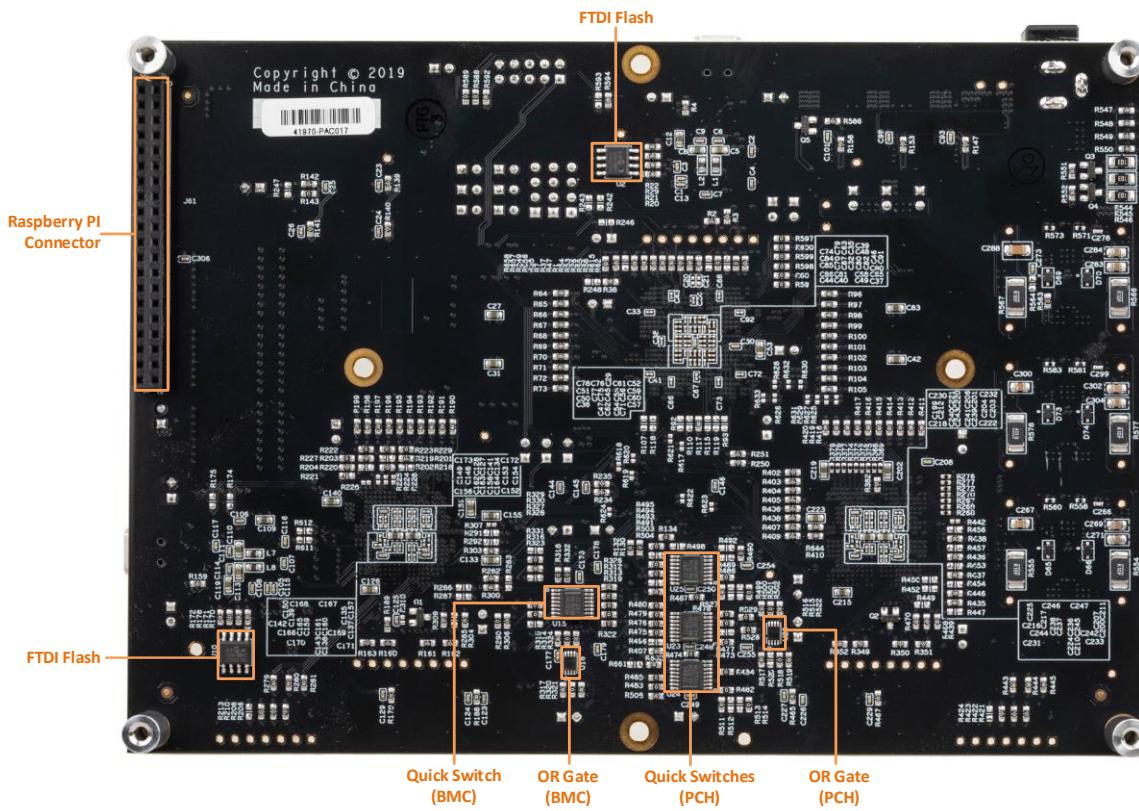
Lattice Sentry Demo Board for MachXO3D, Bottom View
